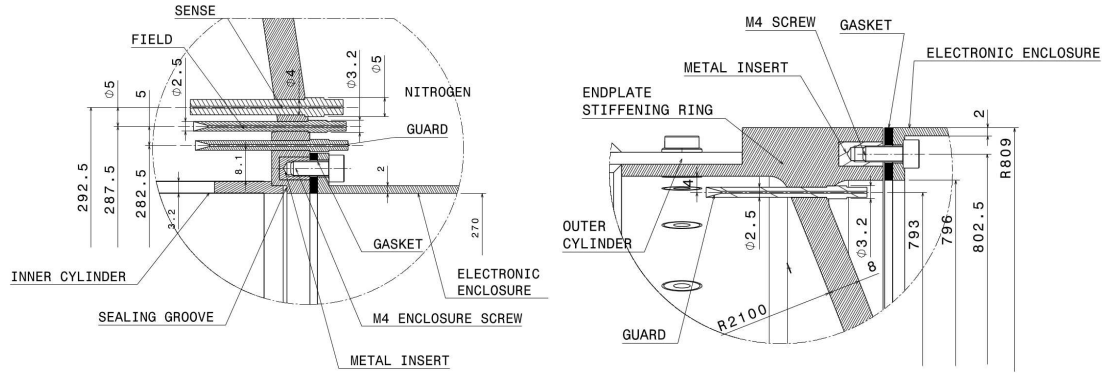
Left: coupling of the DCH inner cylinder to the endplate; right: Detail of the outer flange of the DCH endplates.
